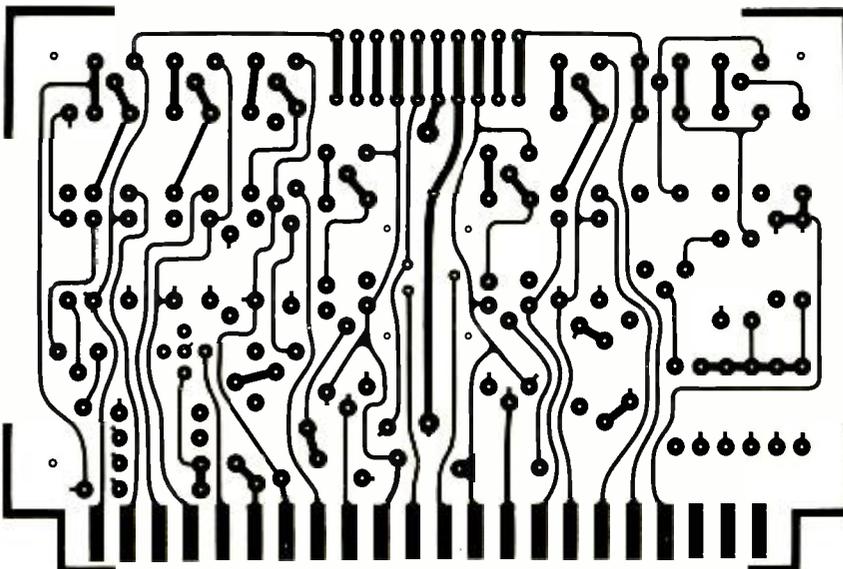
Free-hand drawing showing typical layout of a PC board.
